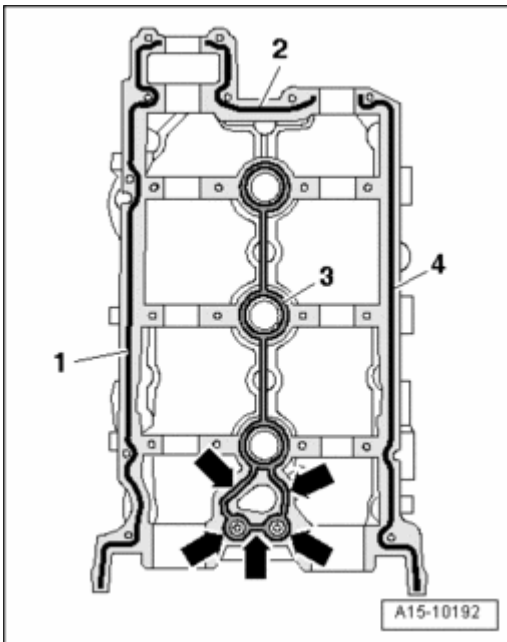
Applying Small Quantity Of Sealant In Seal Groove In Area Of Camshaft Adjuster Solenoid Valve Opening
